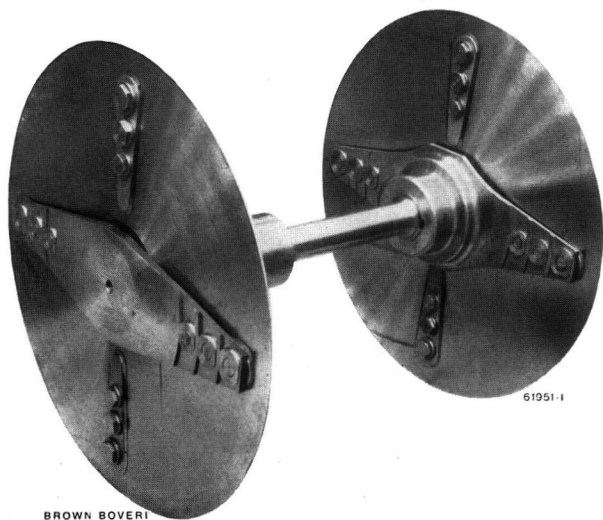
Interesting detail of the new B'₀B'₀ locomotives, series 251, of the Berner Alpenbahn-Gesellschaft: The disc drive each of which transmits 1000 H.P. of the power of the traction motors to the locomotive axle.
